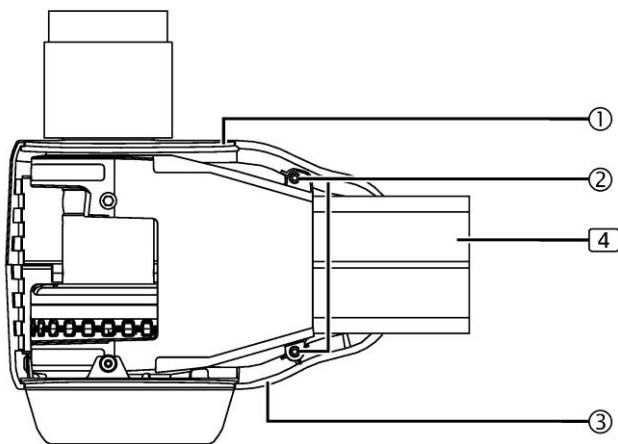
Mounting the left-hand cover panel to the Extension Arm
